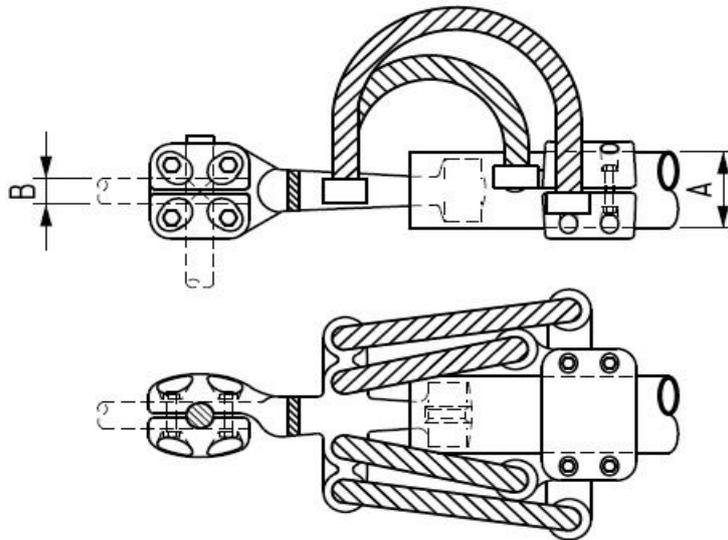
EEC-8HH-S: Expansion Clamp – 8-Hole Horizontal Pad – Equipment Mounted – Sliding
